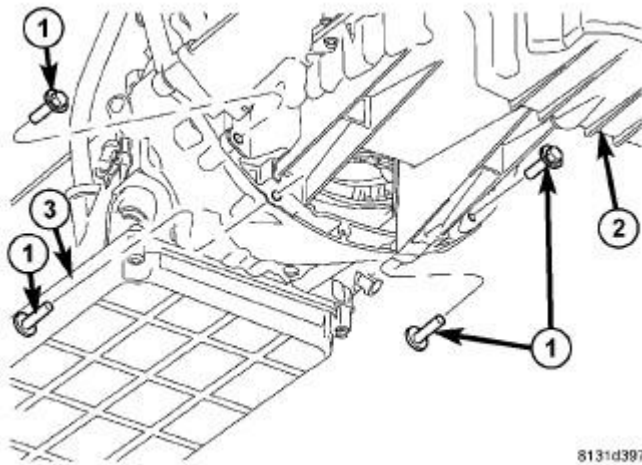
Remove/Install Transmission To Oil Pan Bolts
